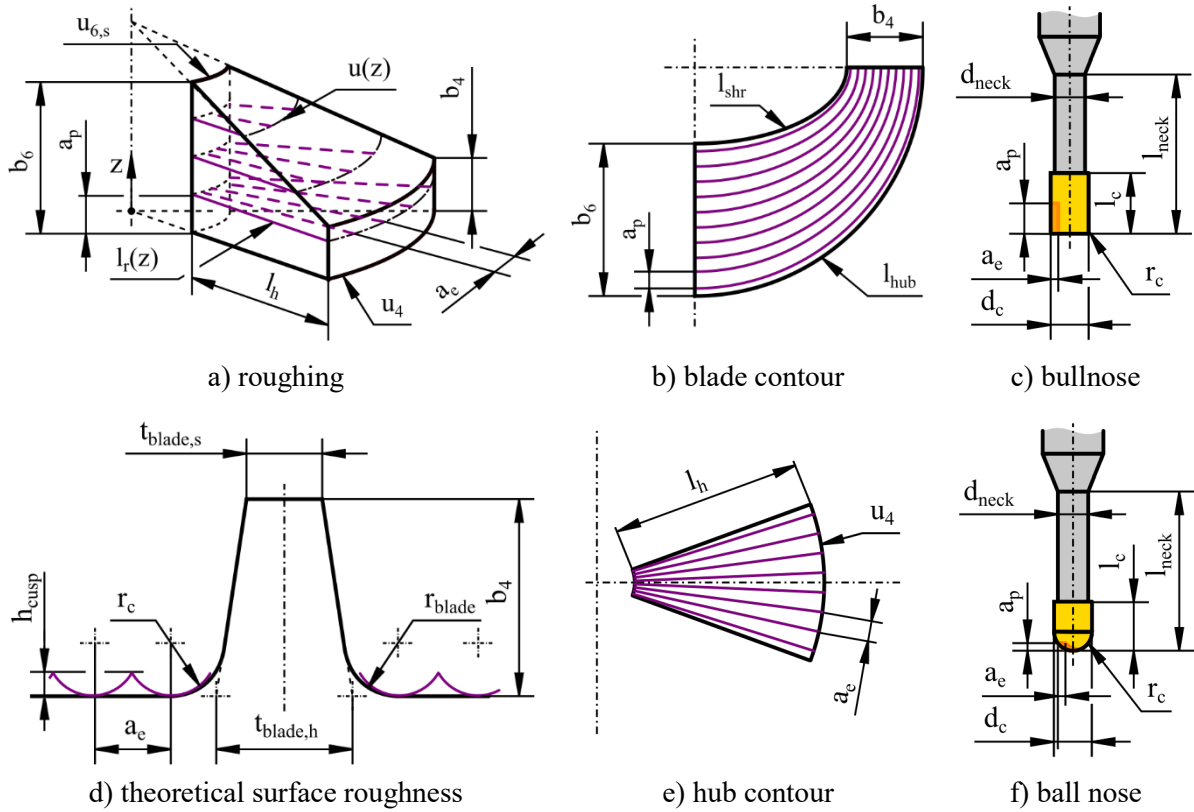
Schematic illustration of the milling toolpath discretization of the flow channel and blade surfaces based on the milling tools used
